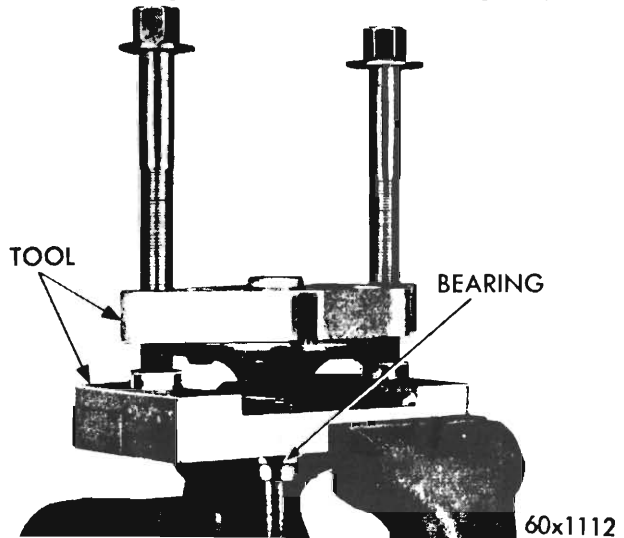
Removing the axle shaft bearing cone and collar using Tool E3C20C.
